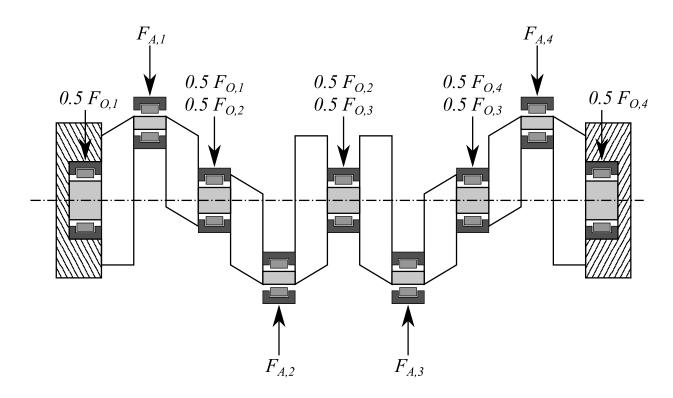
Scheme of loads applied on the bearings in a 4-cylinder engine
